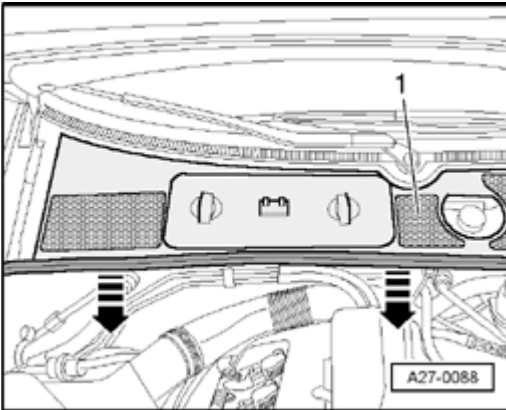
Identifying Plenum Chamber Cover & Rubber Seal
